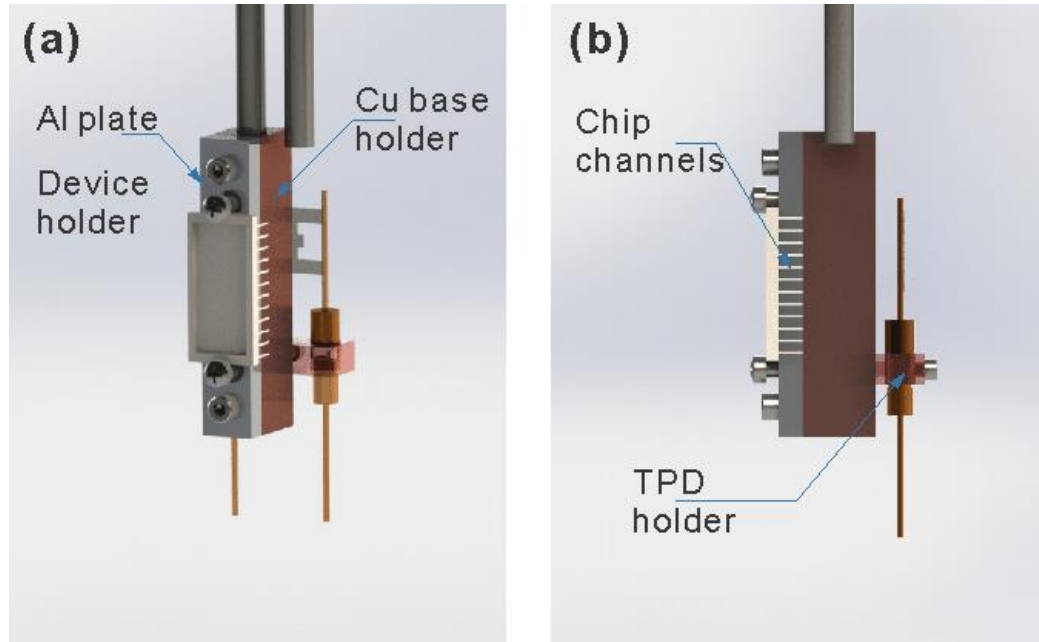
Solidworks model of thin film device holder (a), (b) Front and side views of the device holder.
